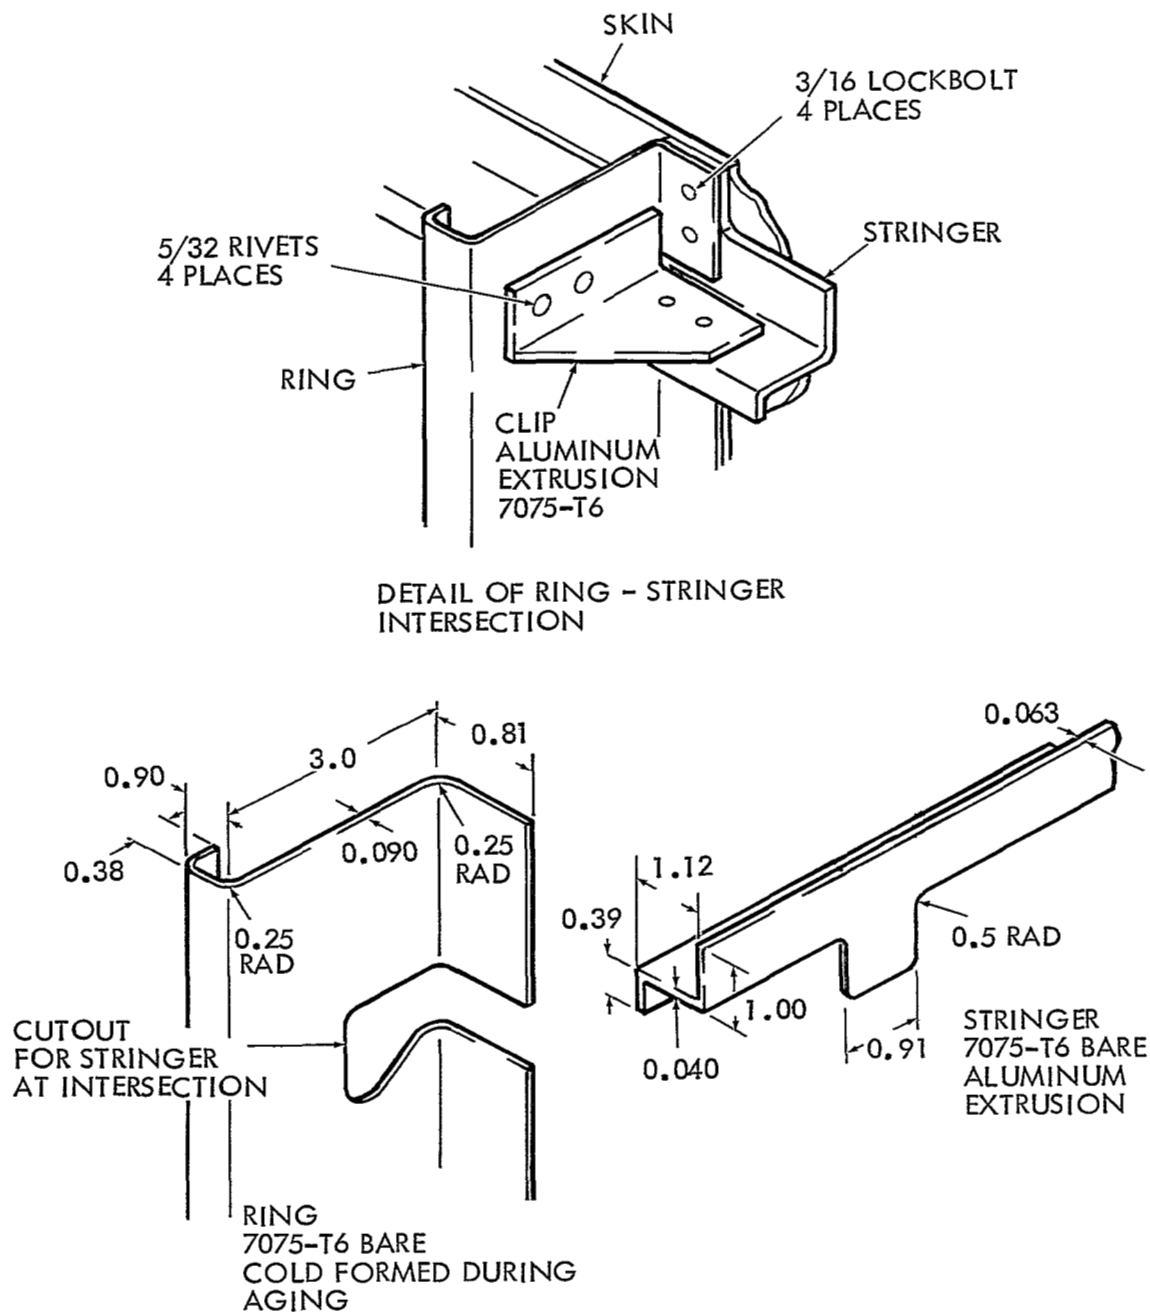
Stringer and Ring Sections for All Multi-Bay Specimens.
